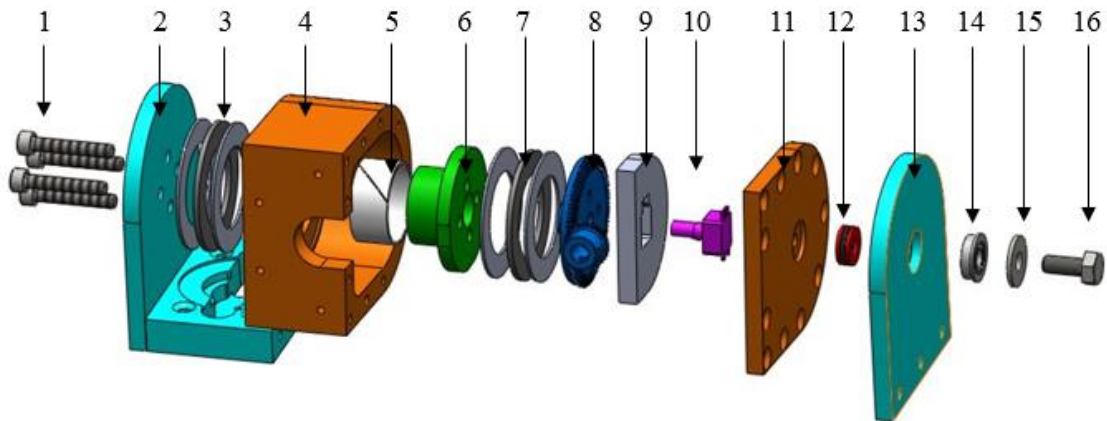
Exploded view of the final shoulder design with (1) hex retaining screws, (2) outer arm plate, (3) thrust needle bearing assembly, (4) shoulder shell, (5) 3D printed bushing, (6) connecting hub, (7) thrust needle bearing assembly, (8) bevel and pinion gear assembly, (9) 3D printed potentiometer holder, (10) potentiometer, (11) shell cover, (12) thrust ball bearing assembly, (13) outer arm plate, (14) radial bearing, (15) retaining washer, and (16) hex bolt.
